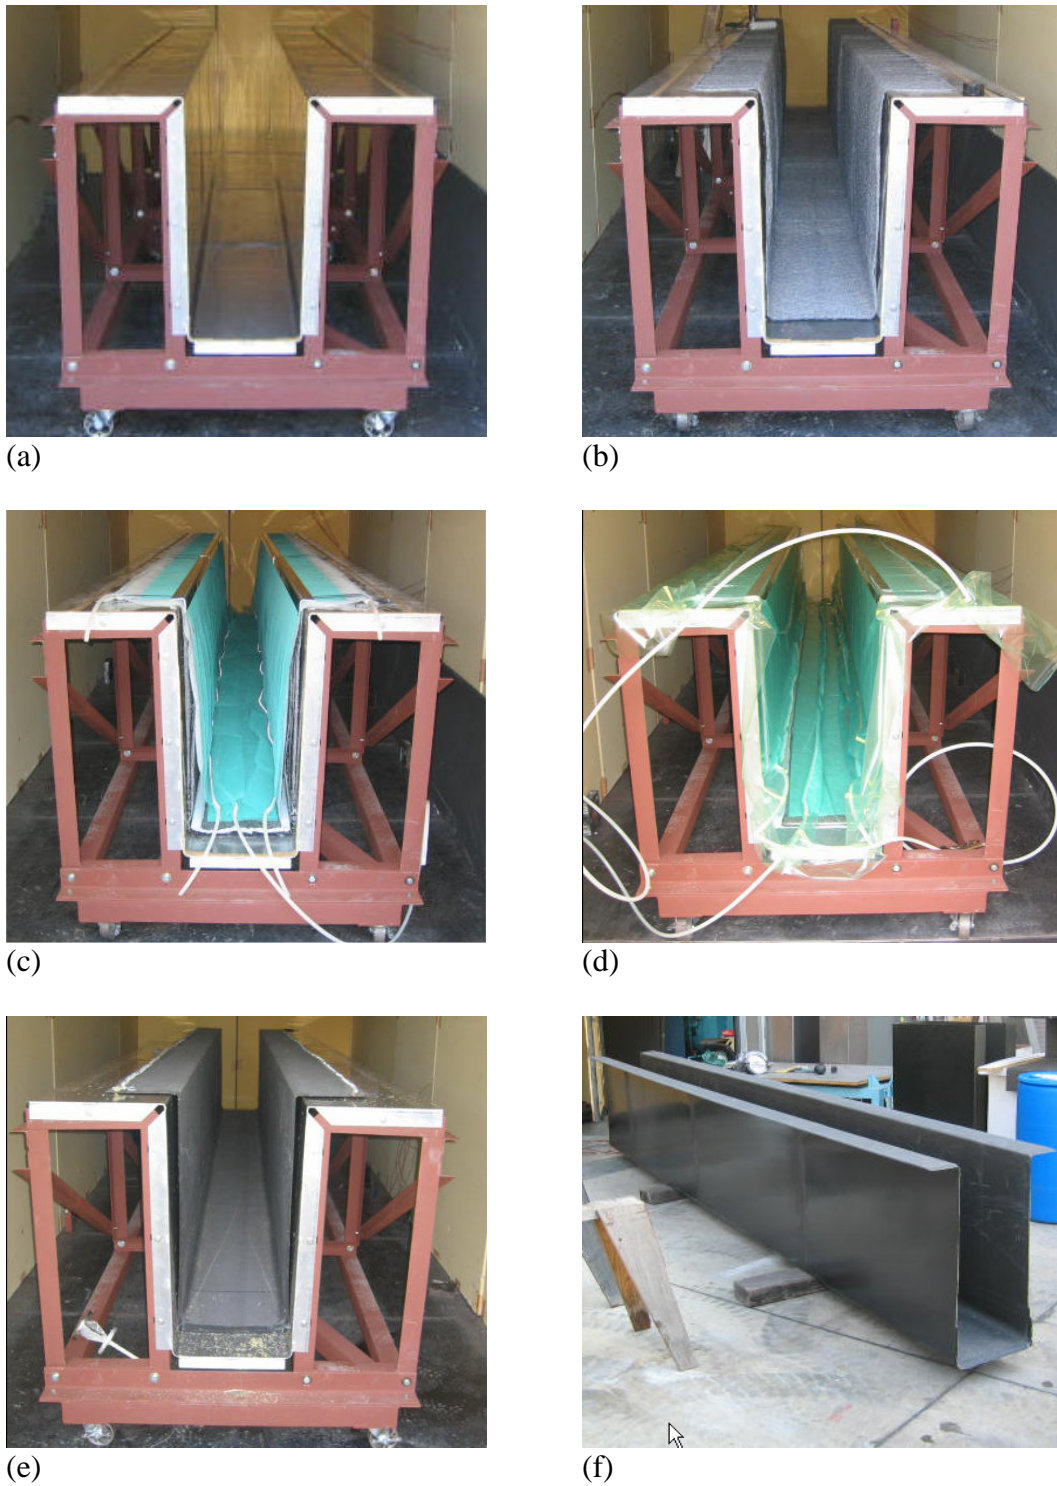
Photographs of beam hull fabrication: (a) Mold, (b) placement of fabric (preform), (c) placement of release fabric, flow mesh, flow springs, and hoses, (d) placement of vacuum bag and infusion, (e) vacuum bag and consumables removed, and (f) beam hull removed from mold.
